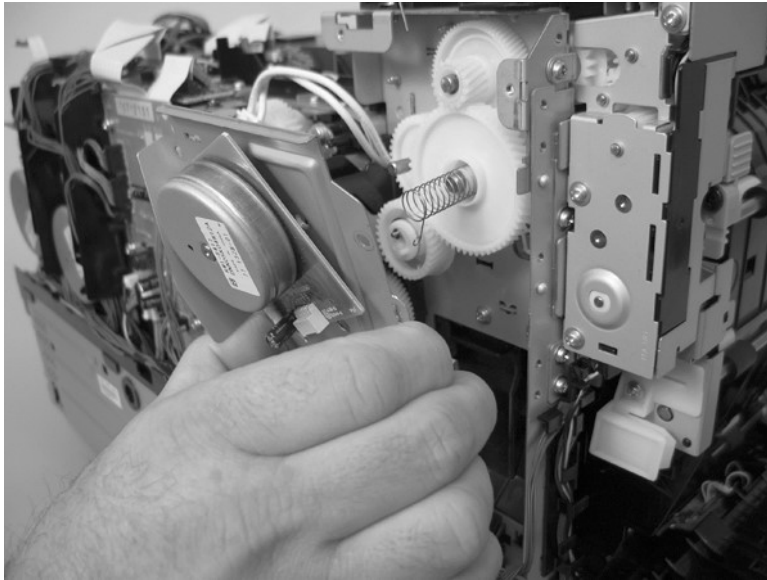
Remove the fuser motor assembly (3 of 4)
